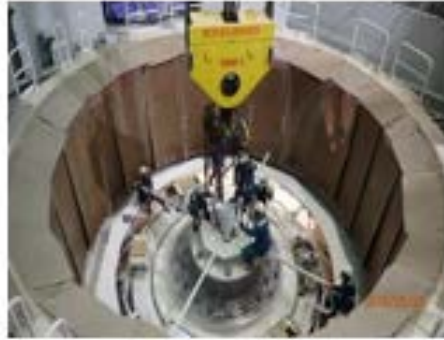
Run-out Check for Coupling Main Shaft and Lower Shaft for Unit 2
